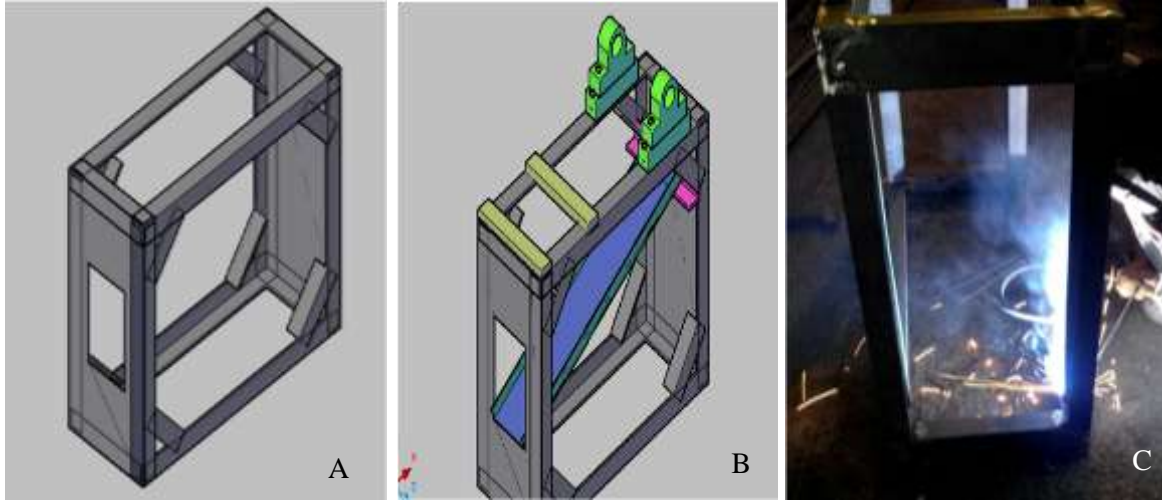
CAD drawing of main frame (A and B) and manufacturing in workshop (C)
